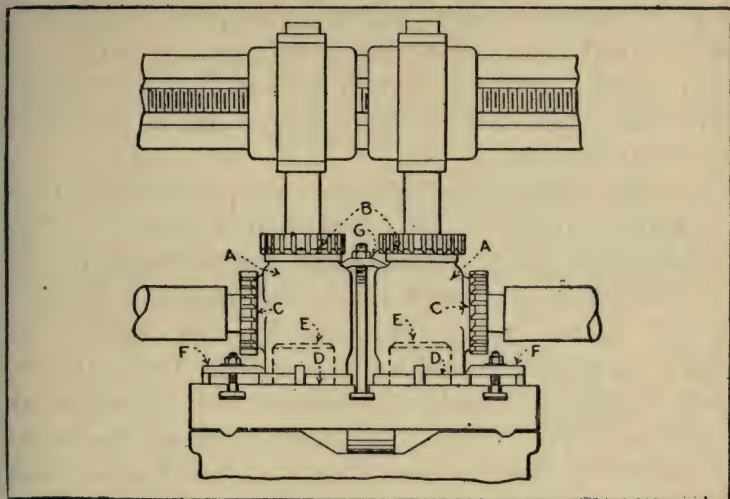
CONTINUOUS MILLING FIXTURE FOR AUTOMOBILE CYLINDERS
